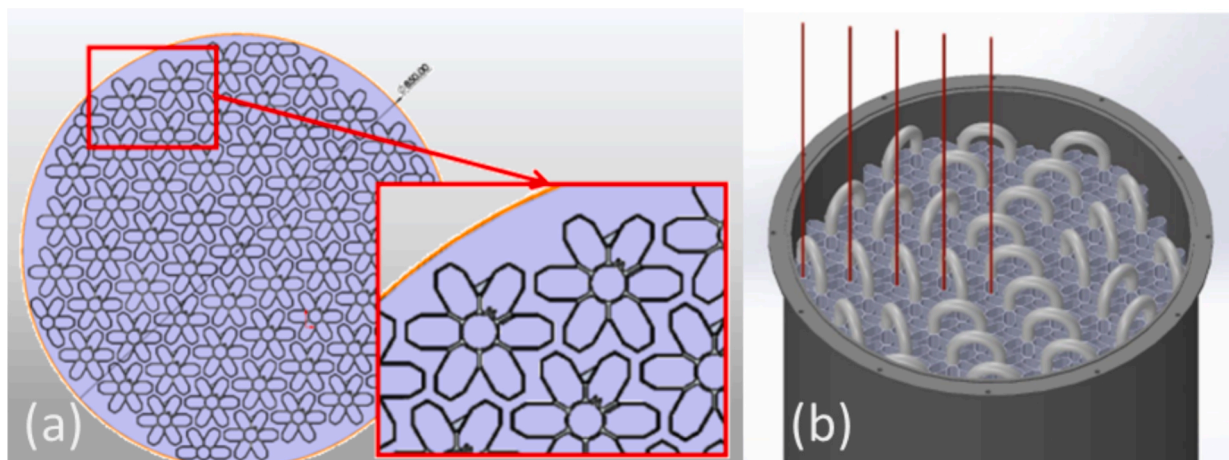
Thermal Energy Storage (a) honeycomb design shell-side inserts & (b) multi-tubes & shell-side inserts inside TES tank [29].
